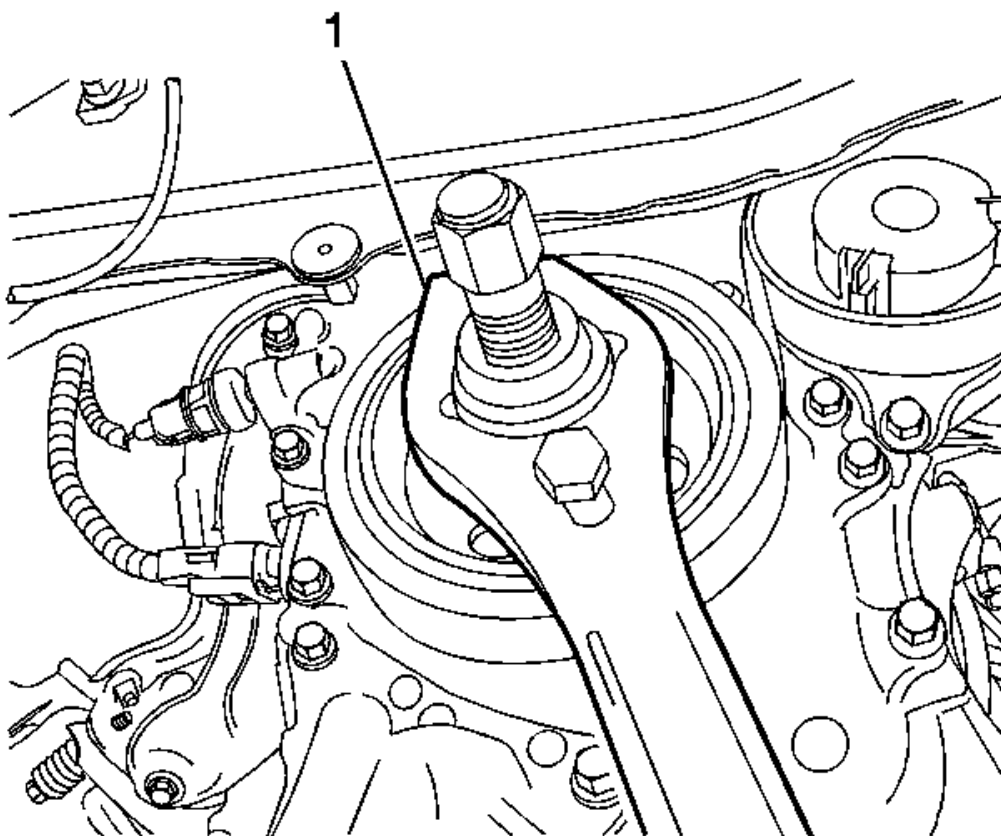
View Of Crankshaft Pulley & Pulley Bolt Removal
